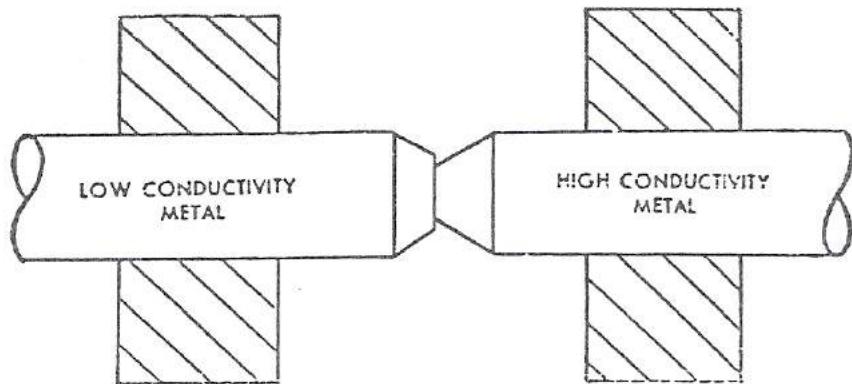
Method of heat balance by unequal beveling of workpieces
